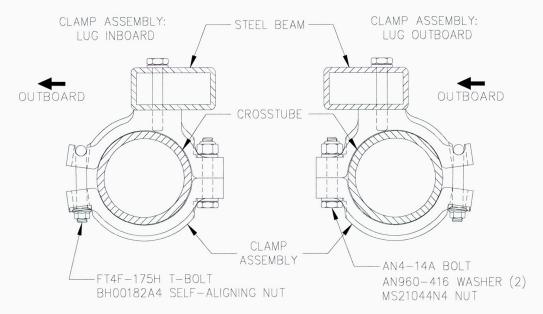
Beam Installation – Clamp Detail Lug Inboard and Lug Outboard Installations Shown
